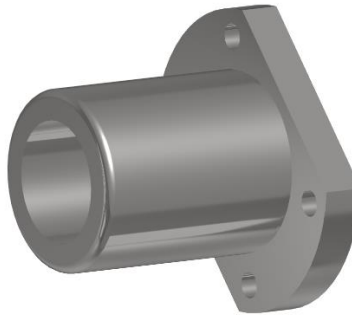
Render of the SLHFCS30 Misumi flanged linear bearing.
